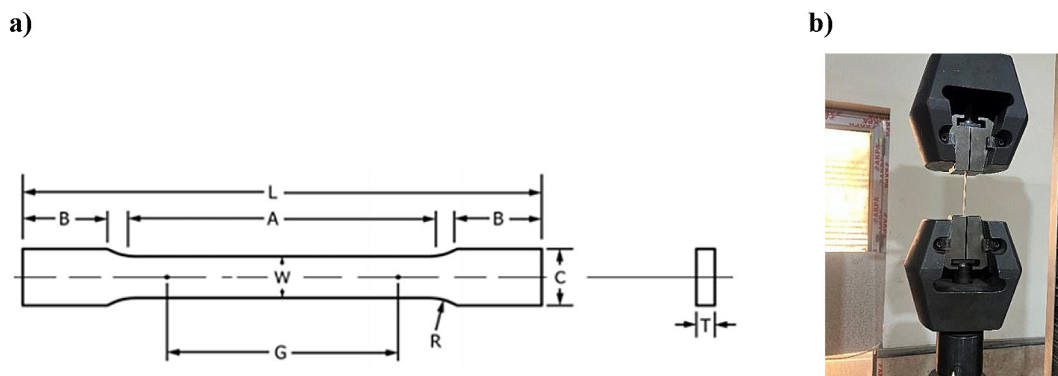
(a) Tensile test specimen dimensions according to ASTM E8/E8M All dimensions in mm, G: gage length 57, W: width 12.5, T: thickness 0.8, R: radius of fillet 12.5, A: length of reduced section 60, L: overall length 180, B: length of the grip section 50, C: width of the grip section 20; (b) tensile test specimens in the testing device
